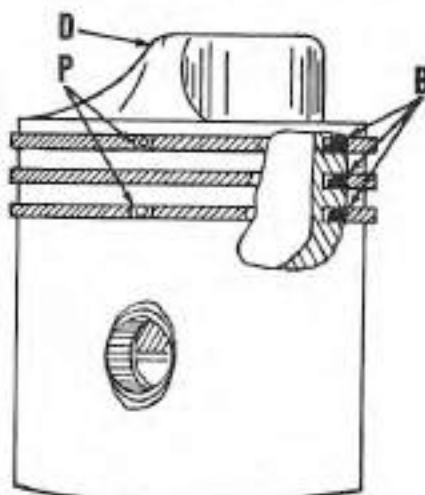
Cross sectional view of piston showing two of the three piston ring locating pins (P). The other pin is in opposite side of piston. Rings are installed with beveled inner edge (B) toward closed end of piston. Deflector (D) directs the flow of incoming fuel charge for proper scavenging.
